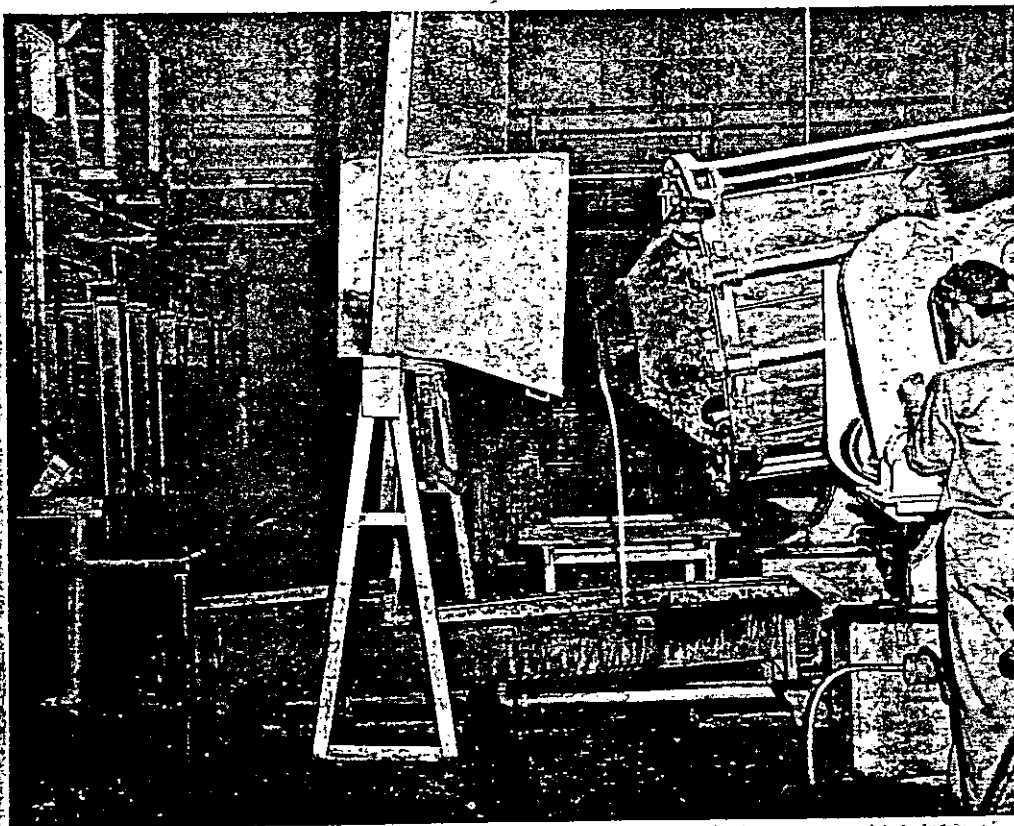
Rotary-type frit smelter in pouring position (Ferro Corp., Los Angeles, Calif.).
